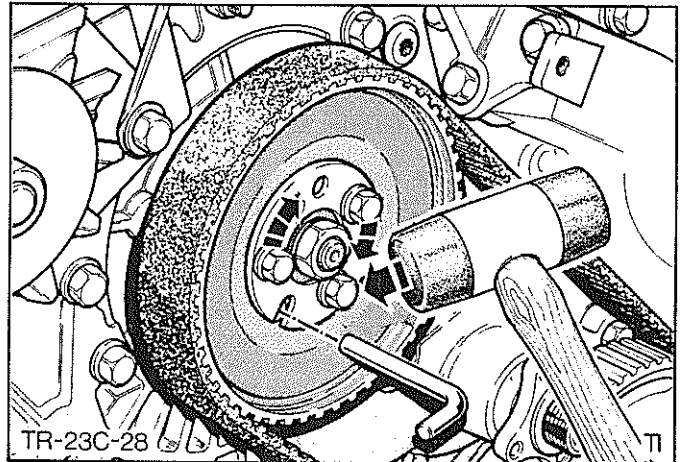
Rotate injection pump driveshaft until timing peg can be fitted.
